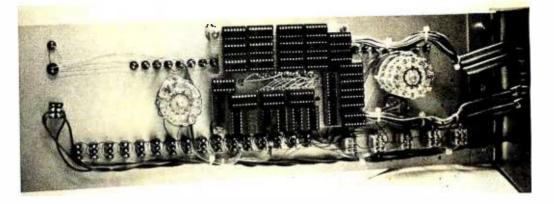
The reverse side of the front panel assembly for Kompuutar. The various switches, indicators and the front panel electronics board are seen in this picture. The P2-J2 cables run to the front panel interface module at right.
